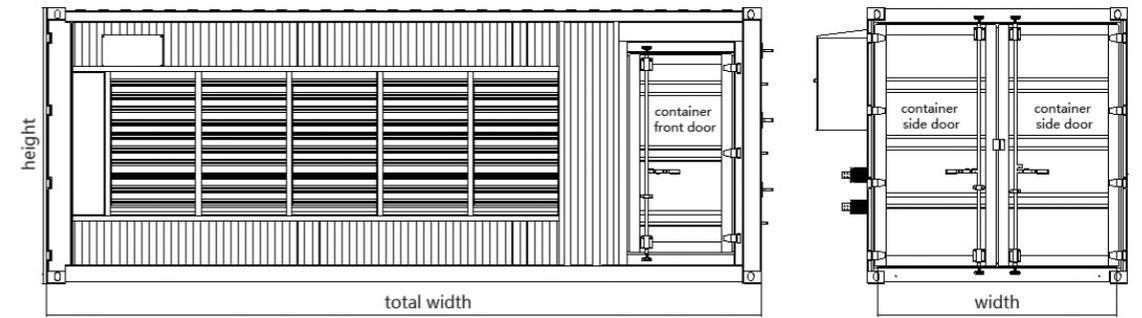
Dimensional Drawing of G31-10kV-Outdoor-Air Cooling FGSVG-C10.0/10-O
